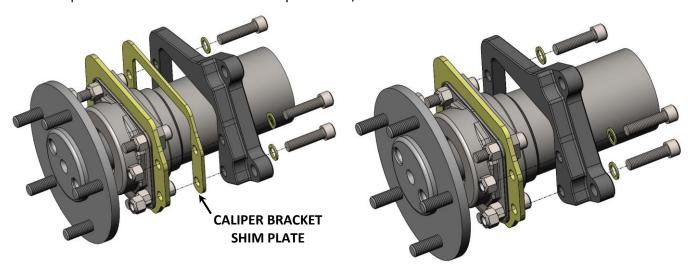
Caliper Mounting Bracket Installation (2.375" Standoff)
